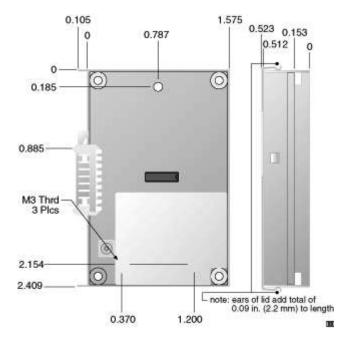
G8 Version 1, Shield Case Dimensional Drawing Top View (transparent cover) and Side View
